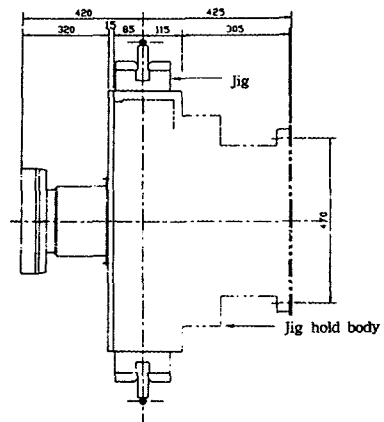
Edge line of the jig body and housing assembly supporting jig body
